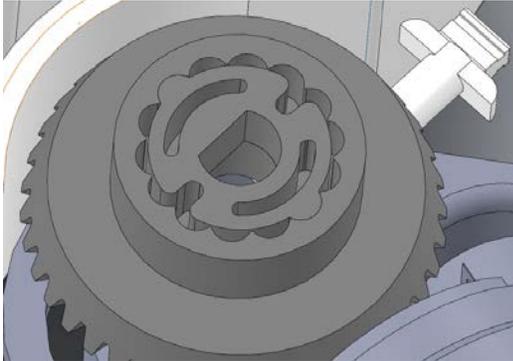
A flexure clutch mechanism was installed in arm joints to prevent gears from being damaged.
